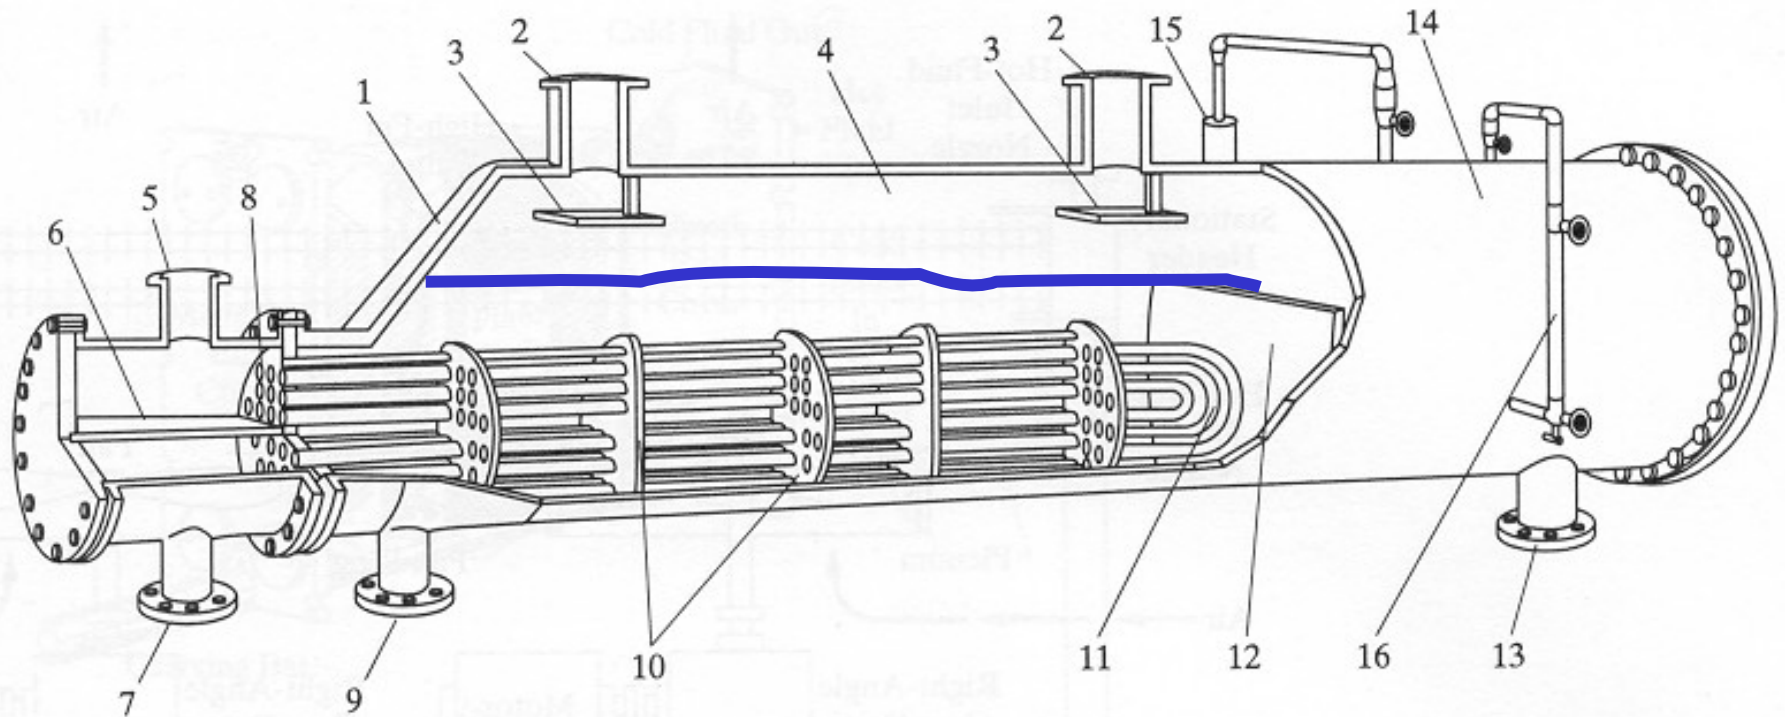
Kettle reboiler: (1) shell; (2) shell outlet nozzles (vapor); (3) entrainment baffles; (4) vapor-disengaging space; (5) channel inlet nozzle; (6) channel partition; (7) channel outlet nozzle; (8) tube sheet; (9) shell inlet nozzle; (10) tube support plates; (11) U-tube returns; (12) weir; (13) shell outlet nozzle (liquid); (14) liquid holdup (surge) section; (15) top of level—instrument housing (external displacer); (16) liquid level gauge.
